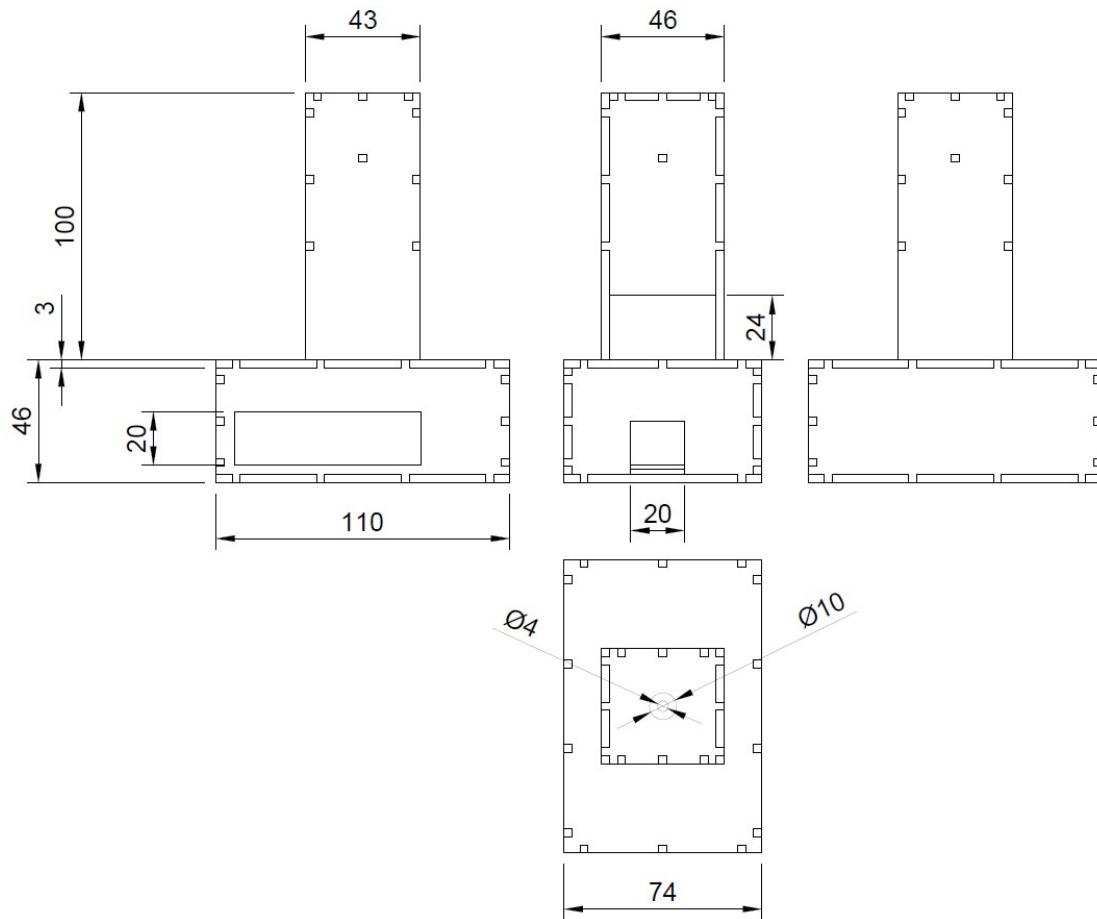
Mechanical drawing of the Raspberry Pi and LED housing. Dimensions shown are in mm.
